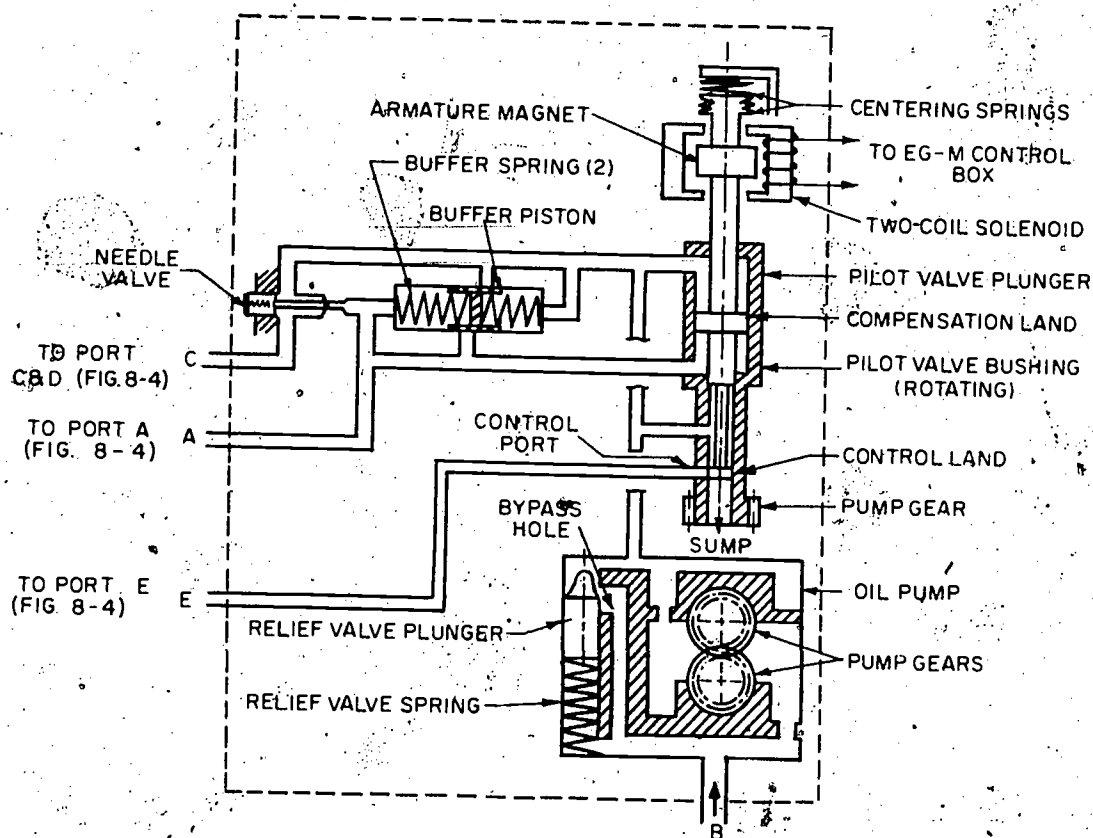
EG-R hydraulic-actuator, mechanical diagram.
